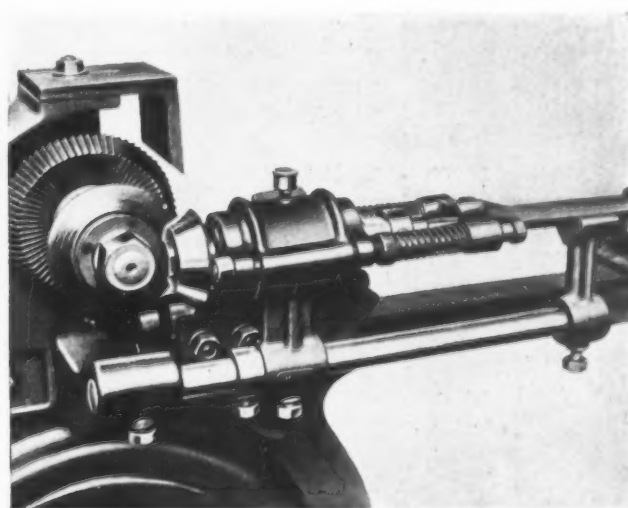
Hot-reaming Attachment for a Finishing Operation on Rock Drill
